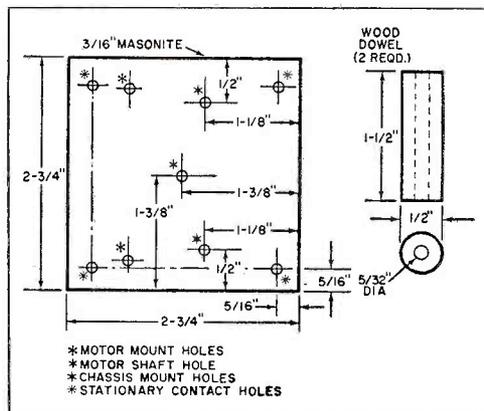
Fabricate the rotary switch on a 2 3/4" x 2 3/4" piece of Masonite and bolt it to the chassis using two 1/2"-long dowels and 2"-long screws.
